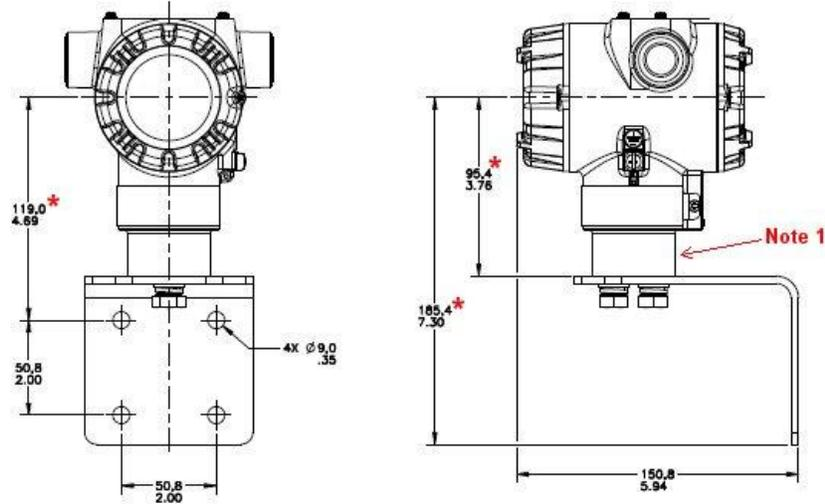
STT850 with adapter housing - Horizontal Wall Mounting
